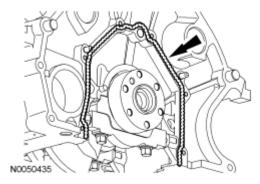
Applying Bead Of Gasket Maker To Rear Crankshaft Seal Retainer Courtesy of FORD MOTOR CO.
